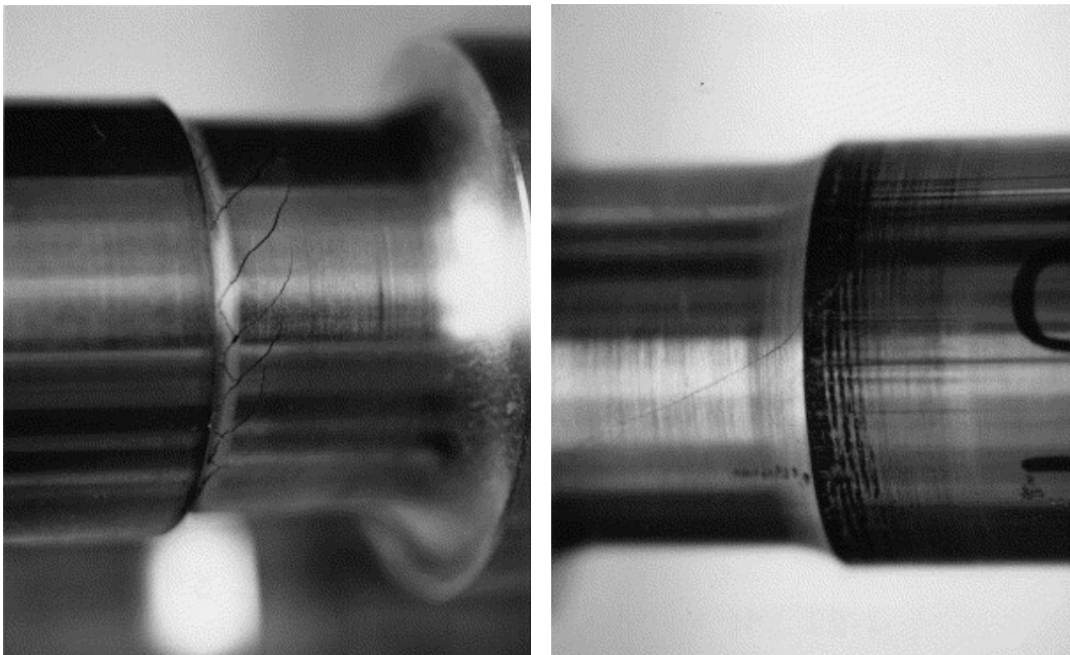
Magnet cracking at axial ends within shrink-fit assembly. [27]
